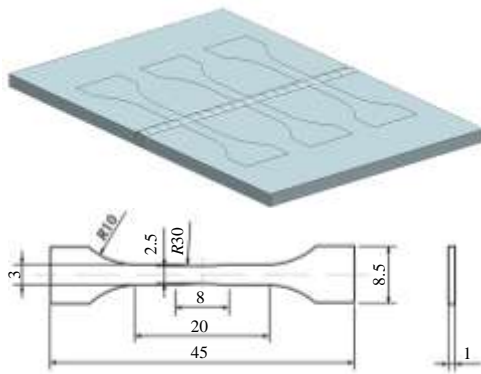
Cutting position and dimension of welded joint specimens used in this study
